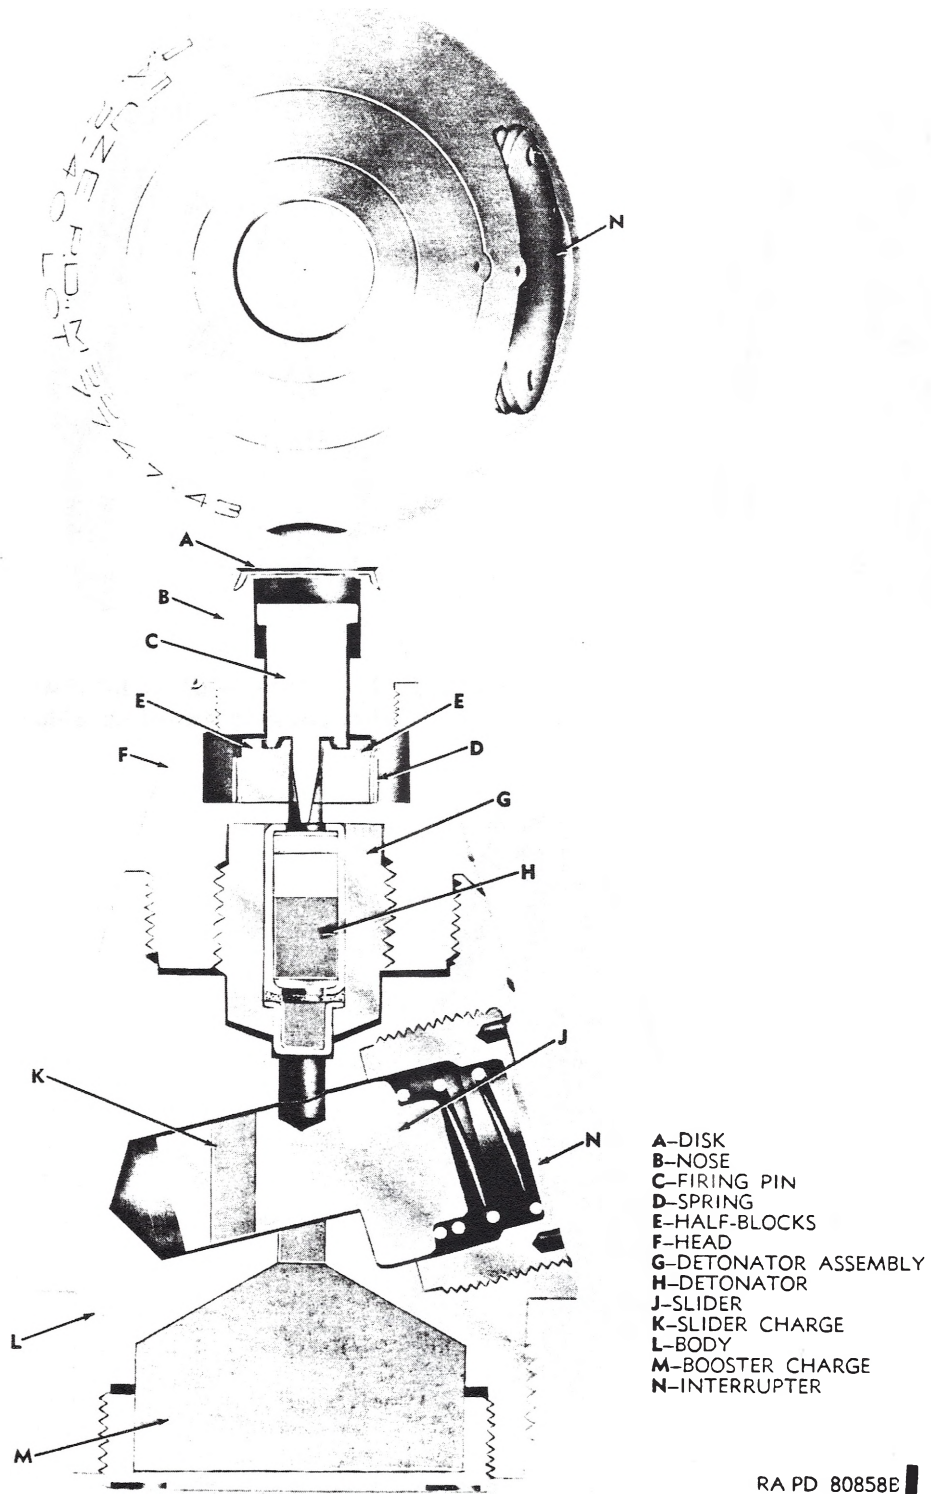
Fuze M86, Cutaway View Showing Unarmed Condition
